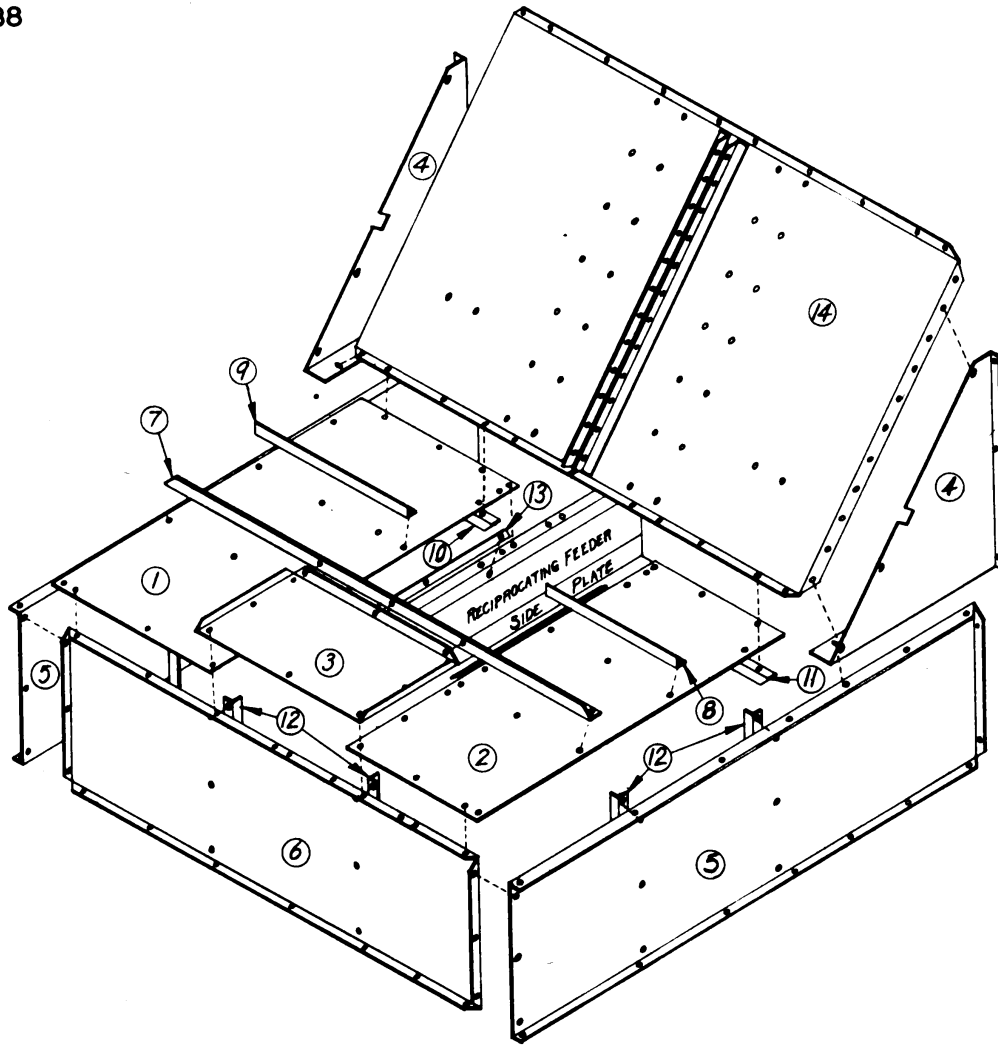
ASSEMBLY OF RECIPROCATING FEEDER HOUSING
